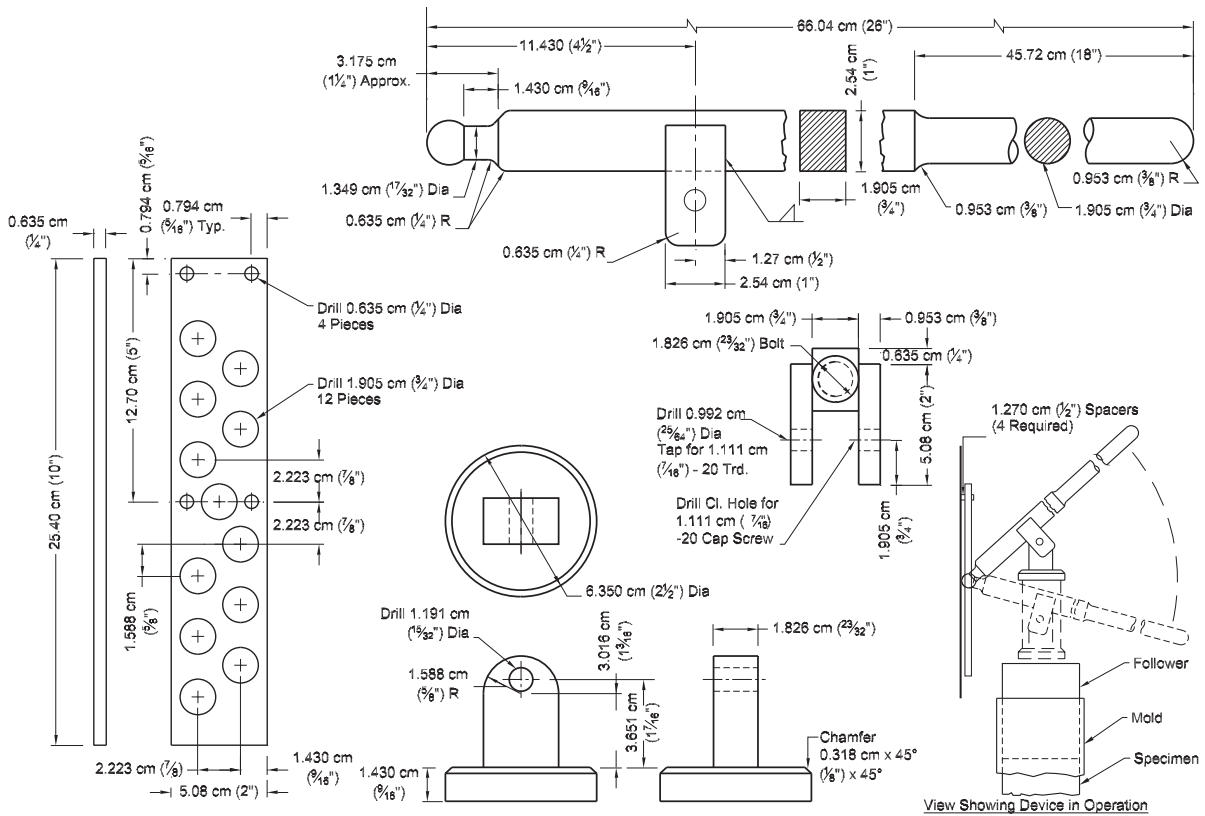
Detailed Drawings of the Test Specimen Push-Out Device
